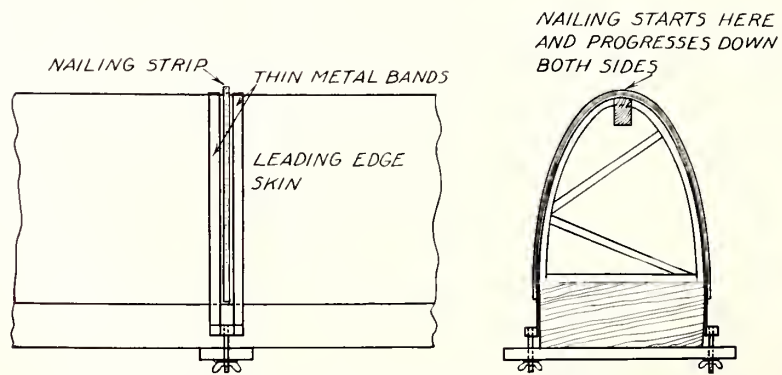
Hold-down band clamp for nail-strip gluing of leading edge of skin.
